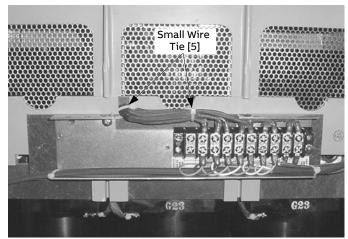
Completed terminal board installation (shown with breaker cover in place).
